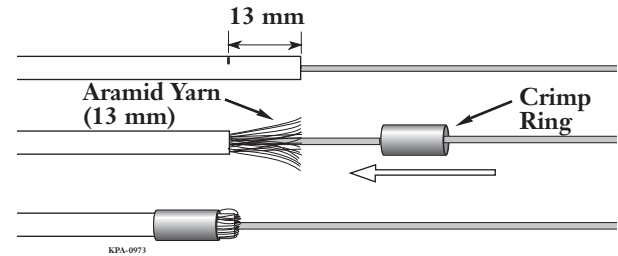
Trim Yarn and Fold Back with Crimp Ring
